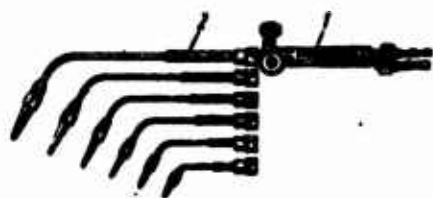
Universal welding burner: 1 - barrel; 2 - tip.
